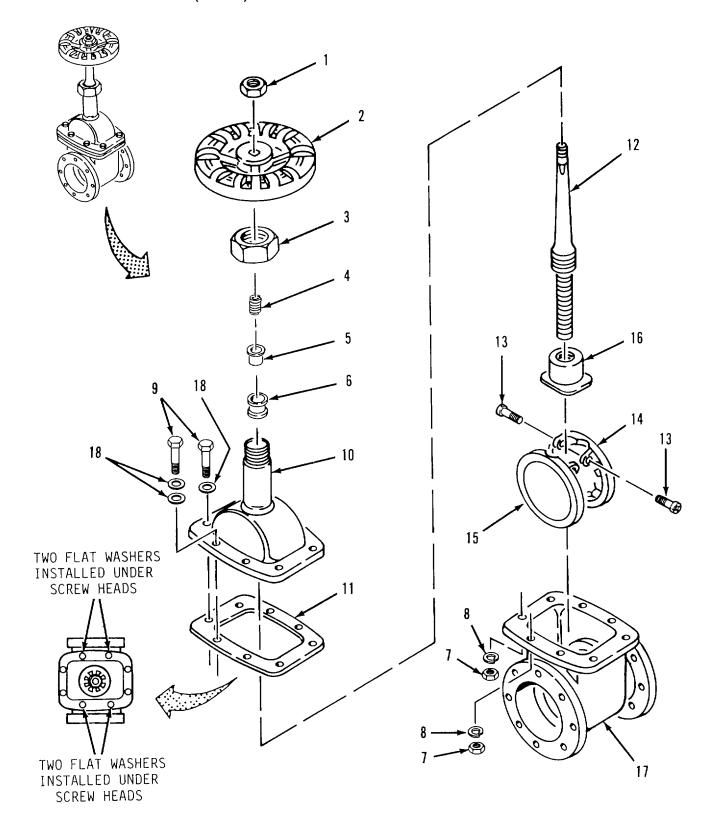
Gate Valve Assembly (4-Inch) Repair.
